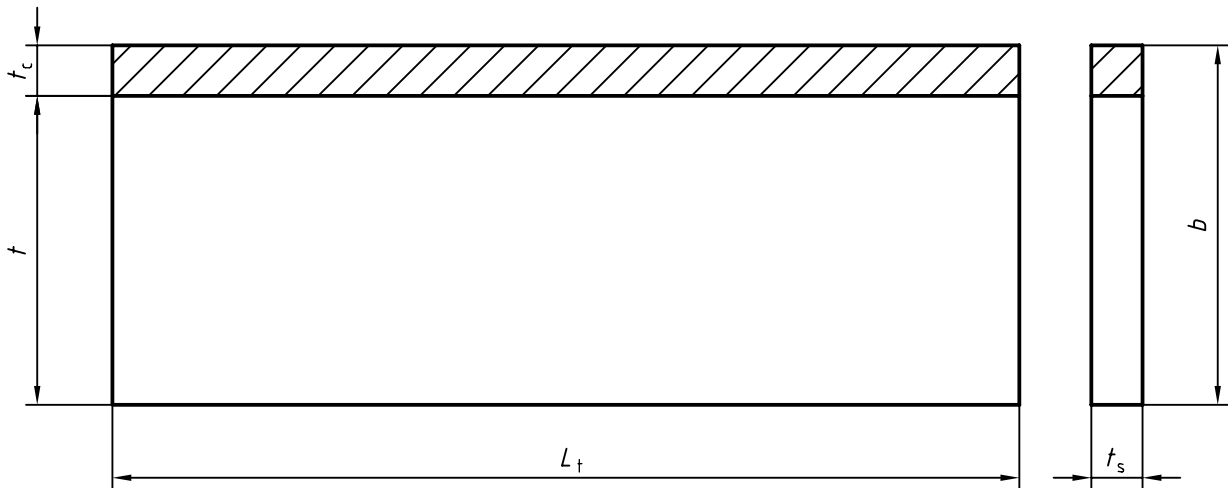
Side bend test specimen for cladding without a butt weld (SBC)
